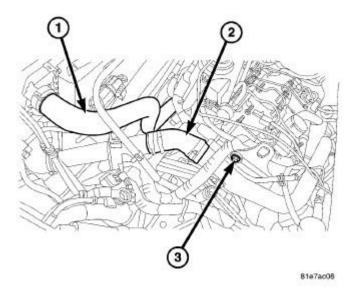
Charge Air Cooler Hoses Courtesy of CHRYSLER LLC
